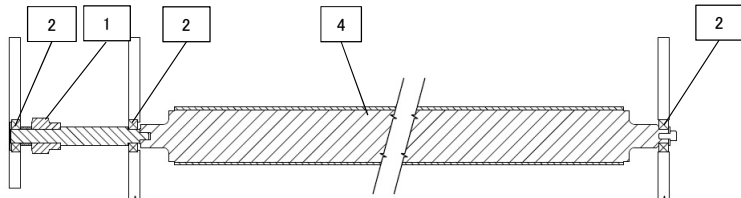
A-5 Input Conveyor Unit (Automatic Centering) - Conveyor roll detail ]
